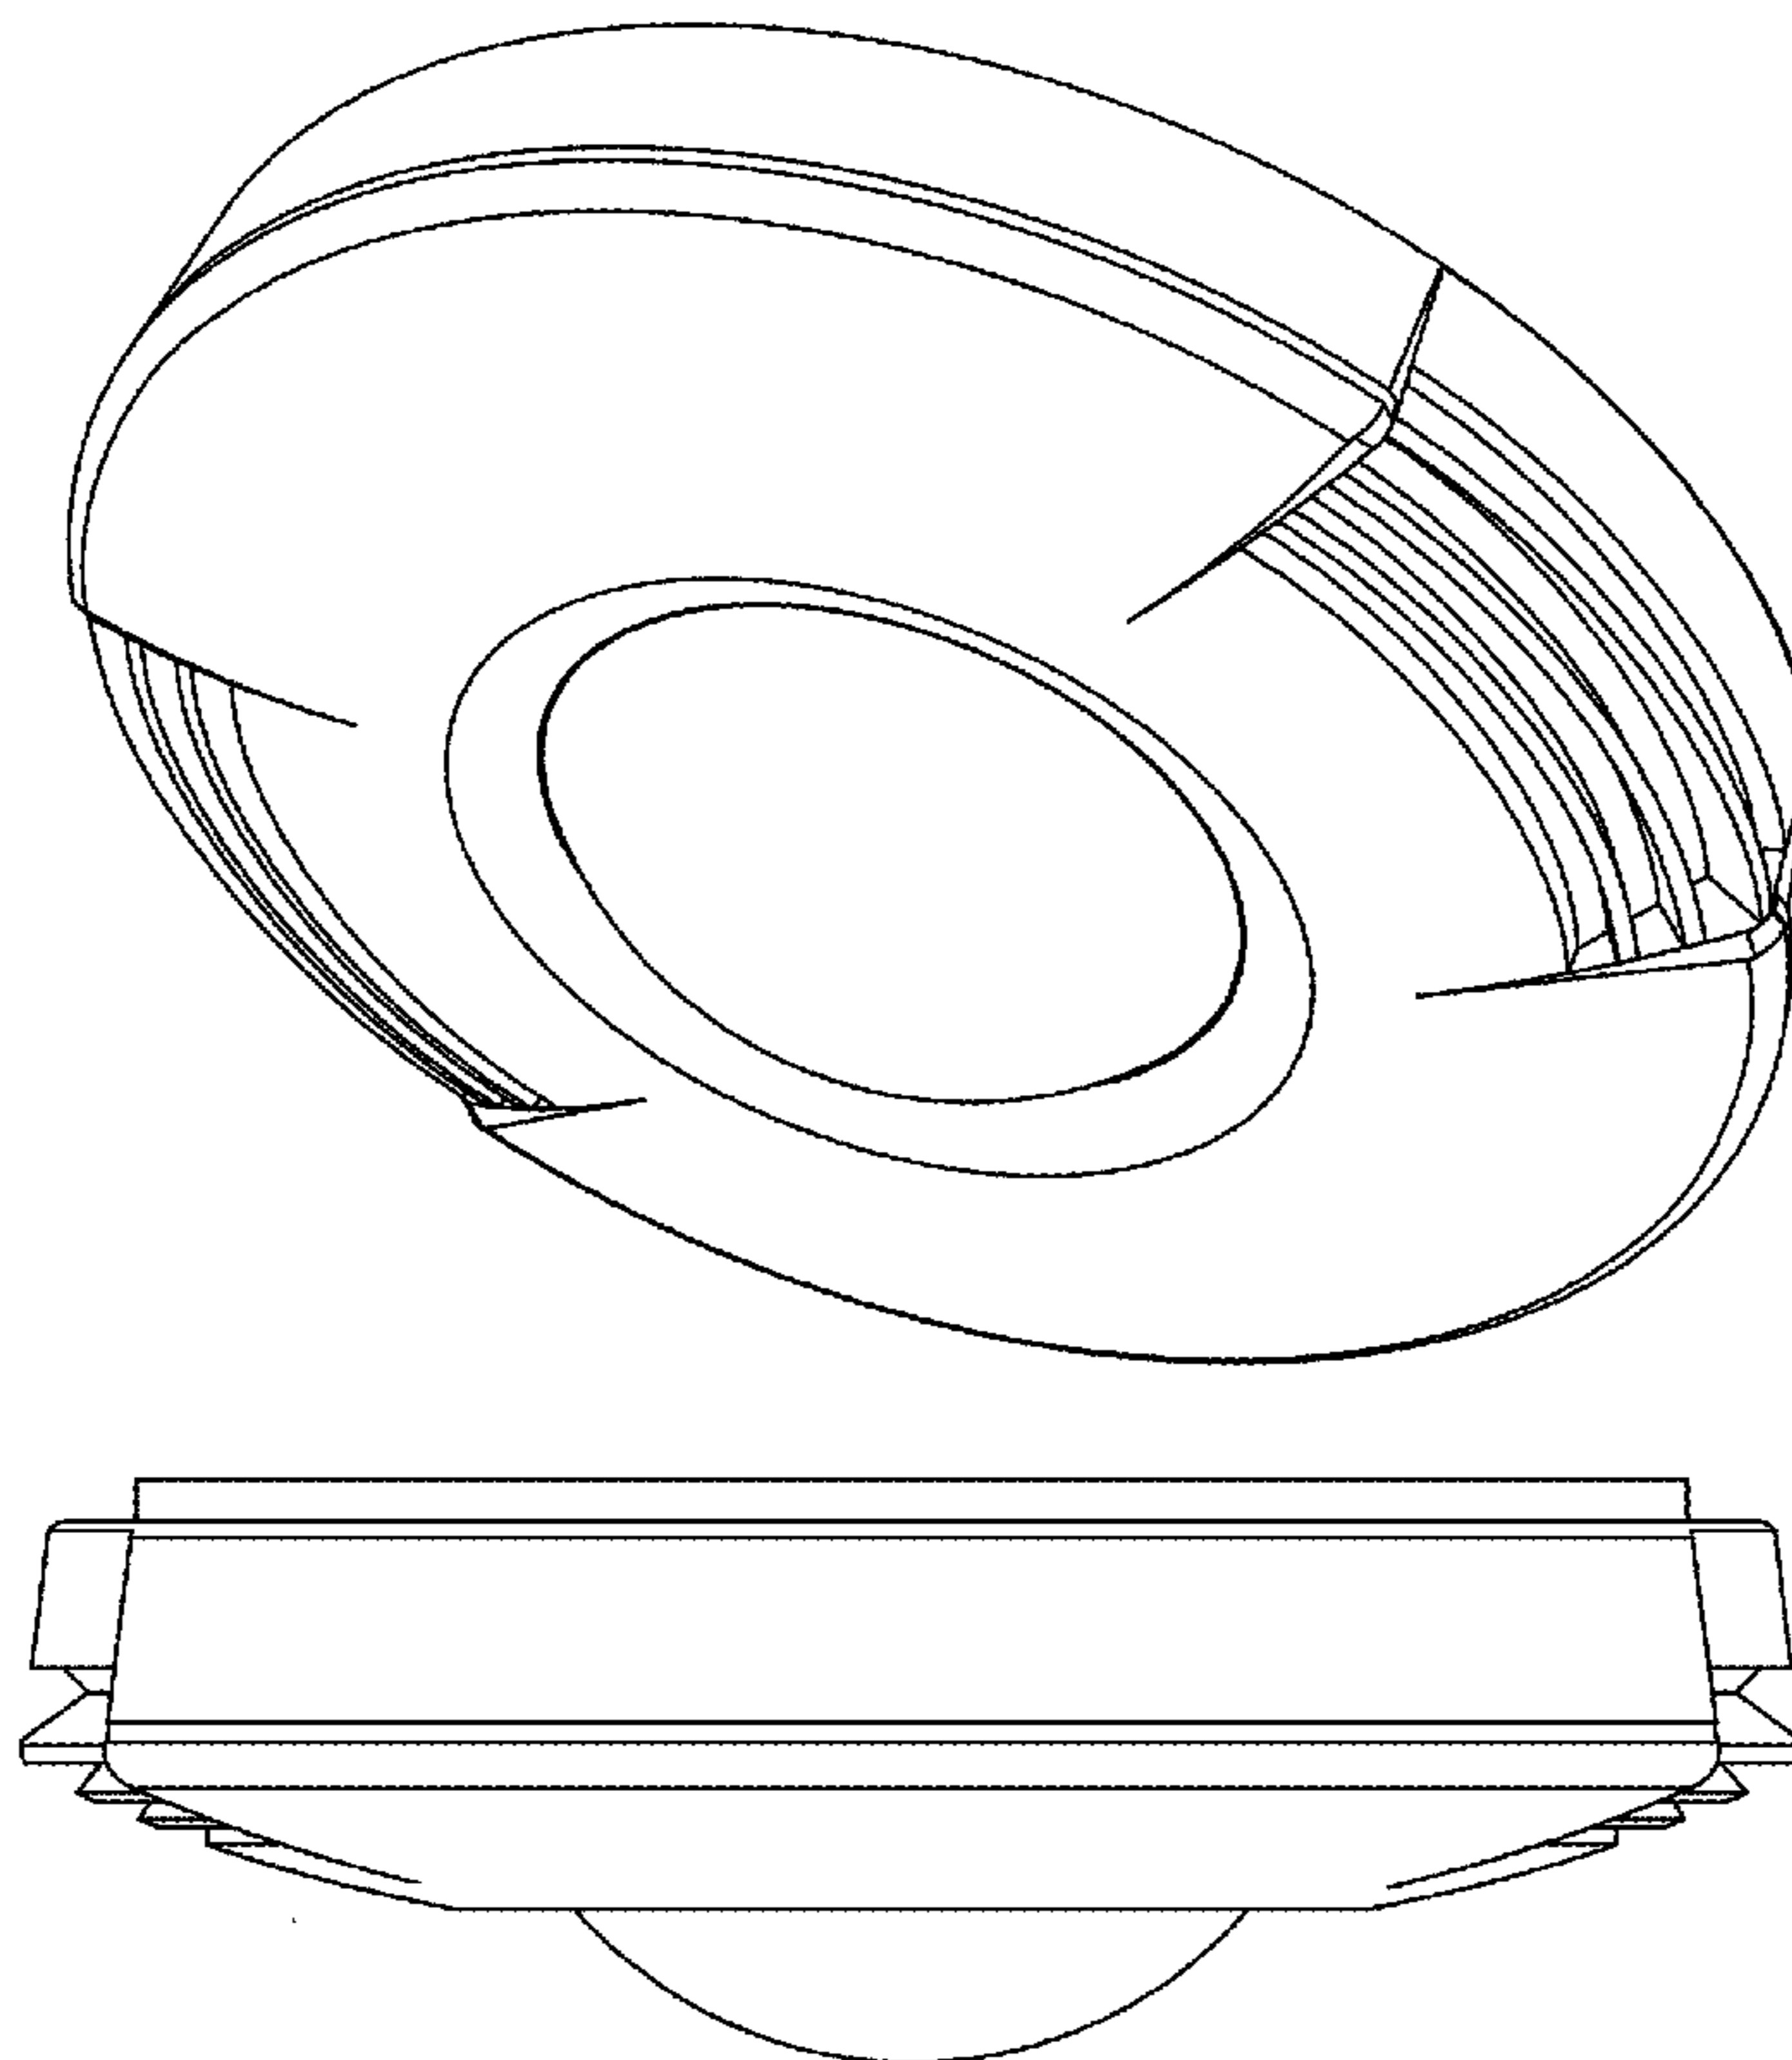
is a bottom view of an embodiment of the ornamental design of the sensor of FIG. 1.
